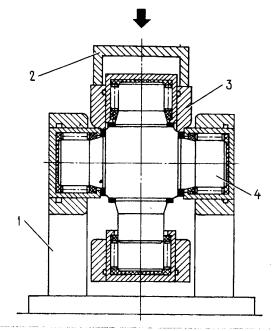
Disassembling Universal Joint: 1 - press support; 2 - bushing; 3 - universal joint yoke; 4 - cross
